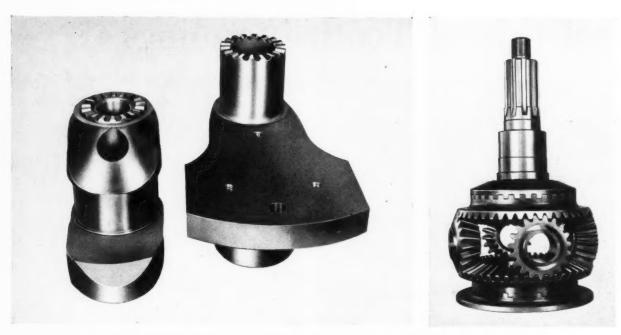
(Left) One Type of Coupling Cut on a Hypoid Gear Grinder. The Parts are Aircraft Engine Crankshafts. Fig. 6. (Right) Semi-universal Couplings can be Cut on Engine Shafts to Allow for Angular Misalignments up to 2 Degrees
